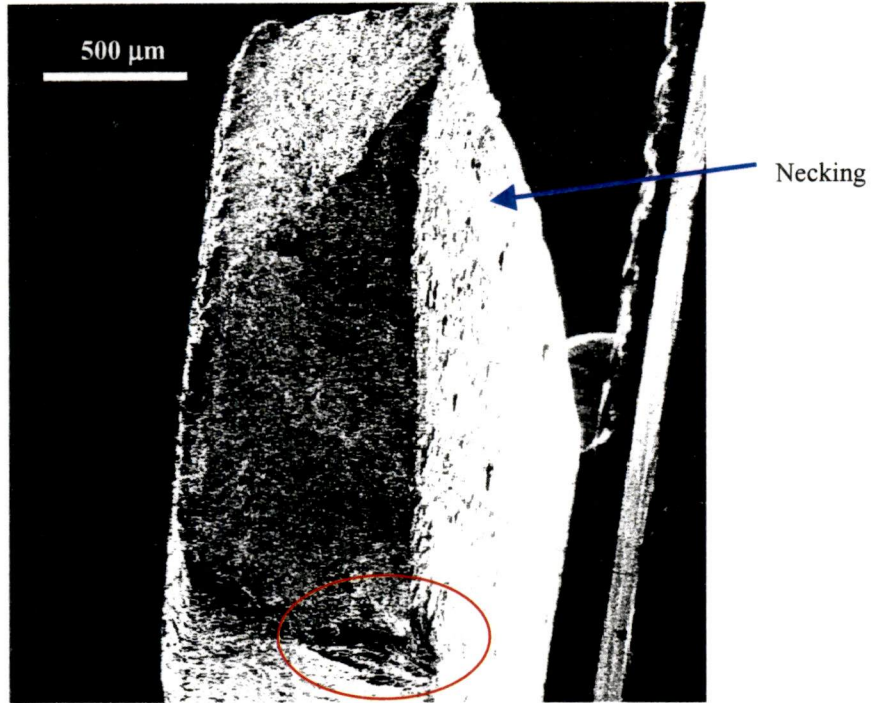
A macroscopic view of the fatigue fracture surface of a pure aluminum P/M sample, WX-10b. The maximum stress is 105 MPa. Notice the crack initiation site (circled) at the lower right corner, and the severe amount of necking.
